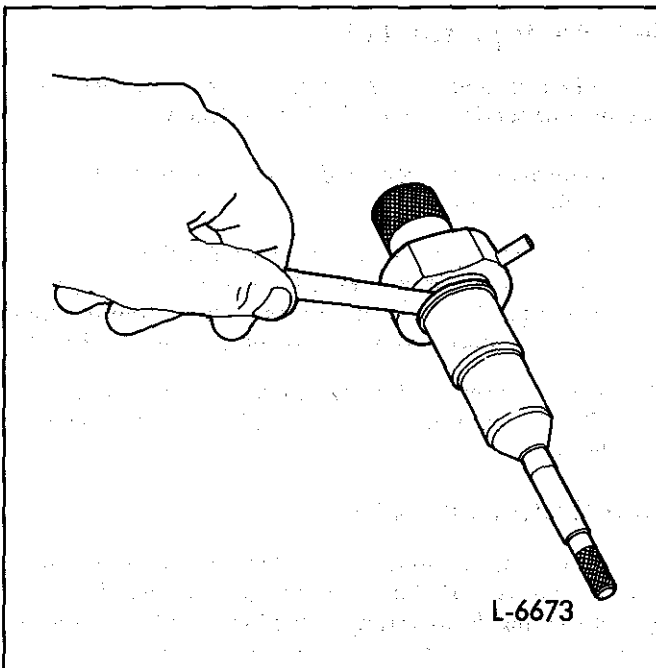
Measuring Clearance Between Installation Tool and Top of Hole Tube Flange
